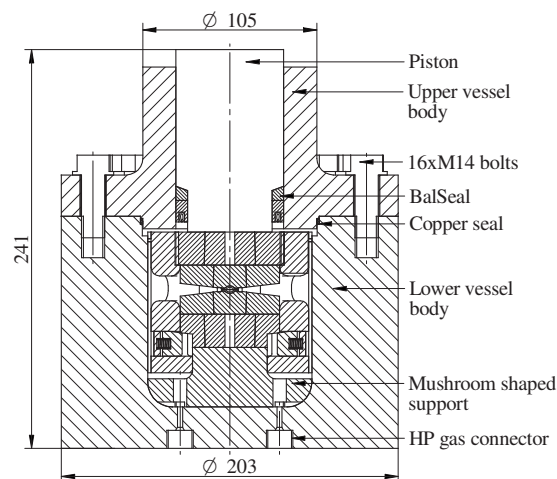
A cross-sectional view of the pressure vessel assembled with the clamp inside. The piston is shown in the initial position.
